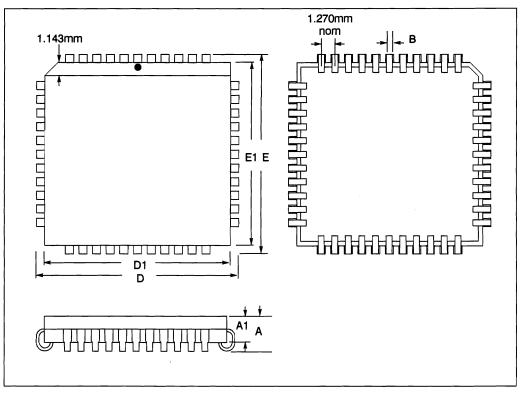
IMS G178 44 pin PLCC J-bend package dimensions
